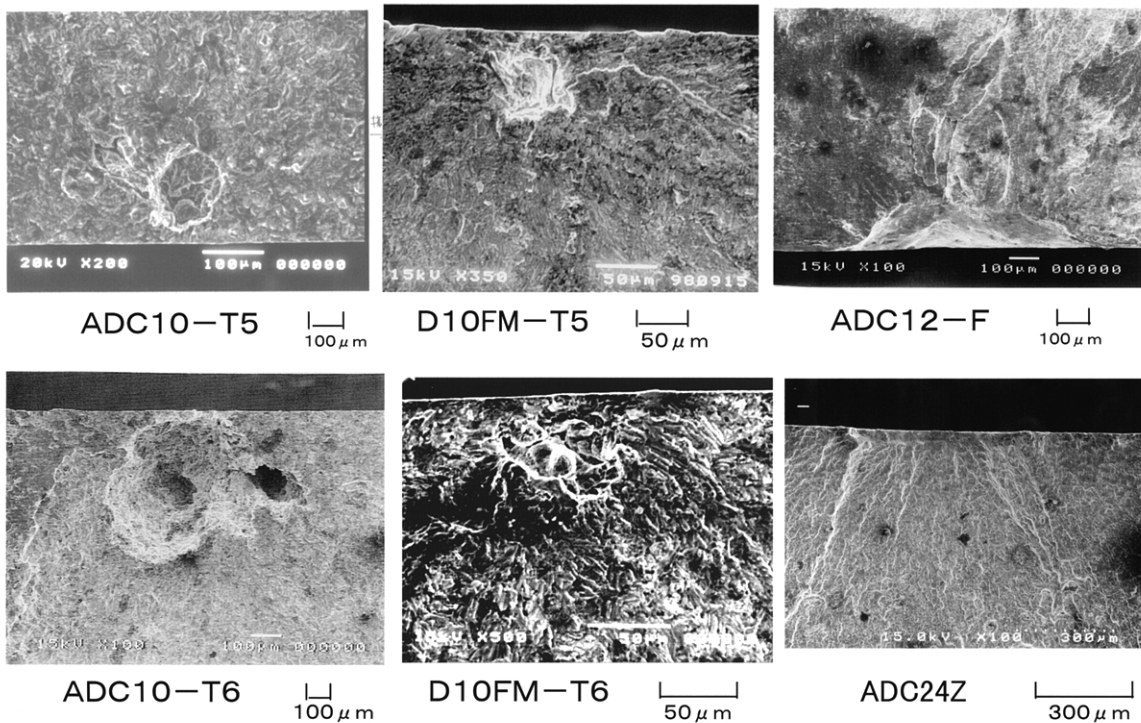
Fracture surfaces of crack initiation portion
